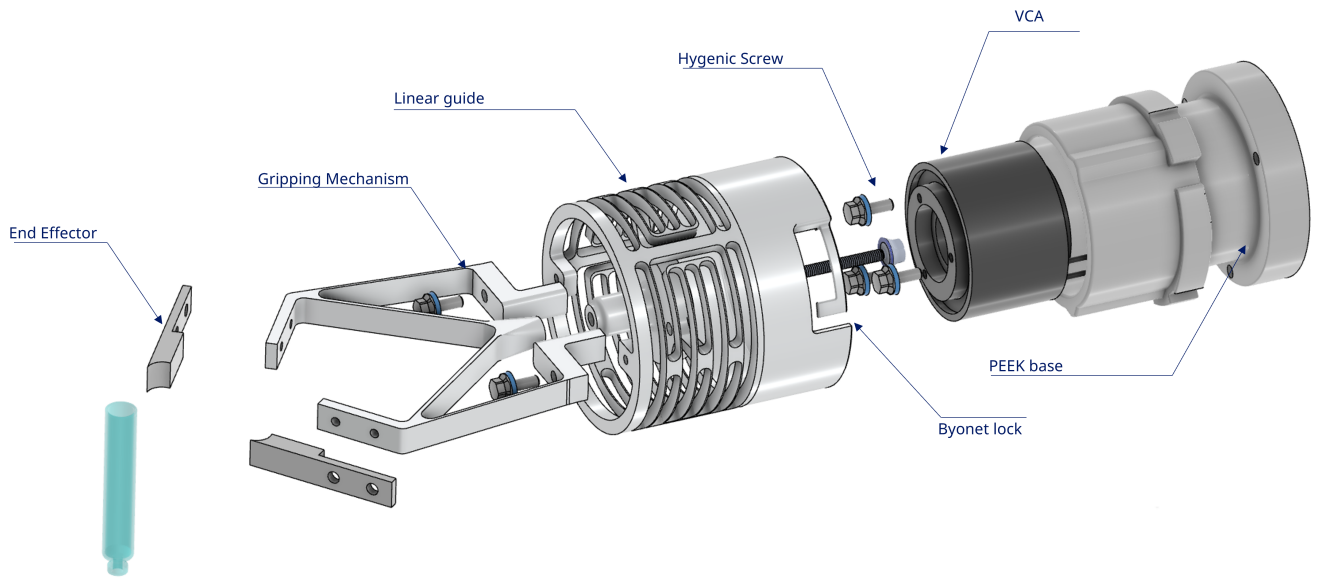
Exploded view of the Final design as it has been ordered for further analysis
